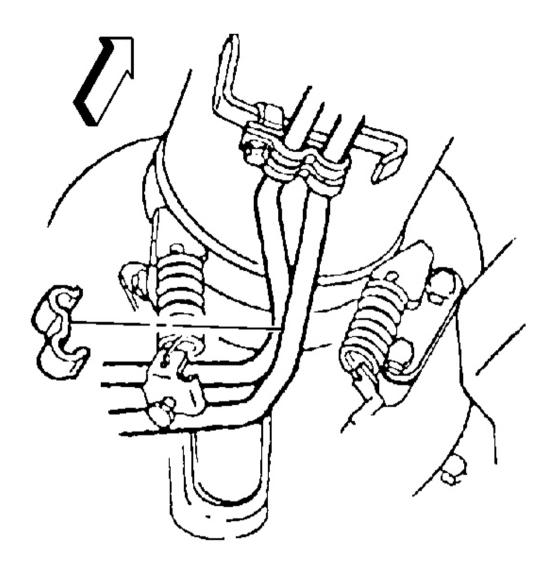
TOC Rear Pipe & Rear Clip Courtesy of GENERAL MOTORS CORP.
